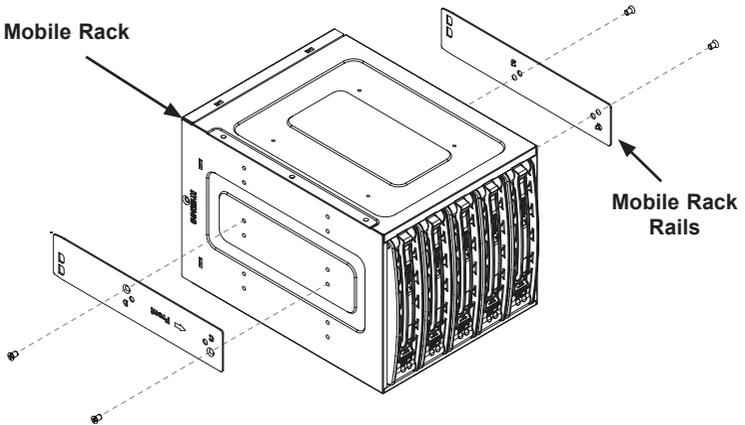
Add Storage Module Rails to the Mobile Rack
